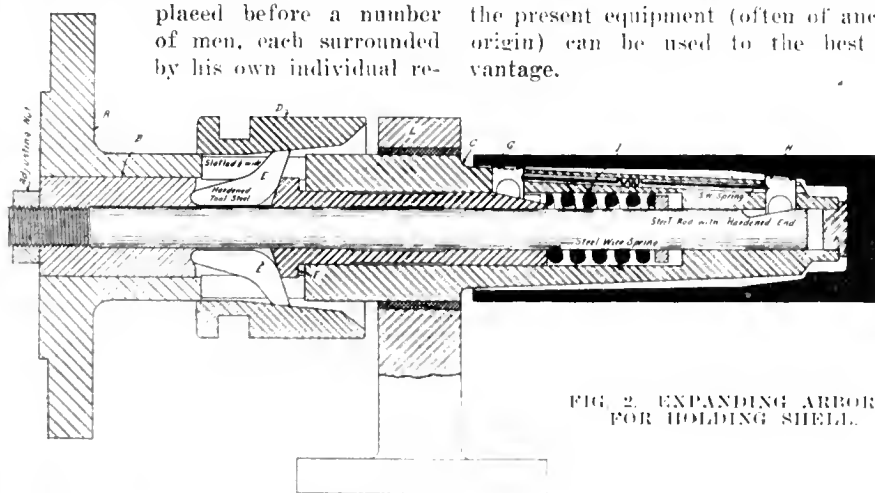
EXPANDING ARRANGEMENT FOR HOLDING SHELL.
